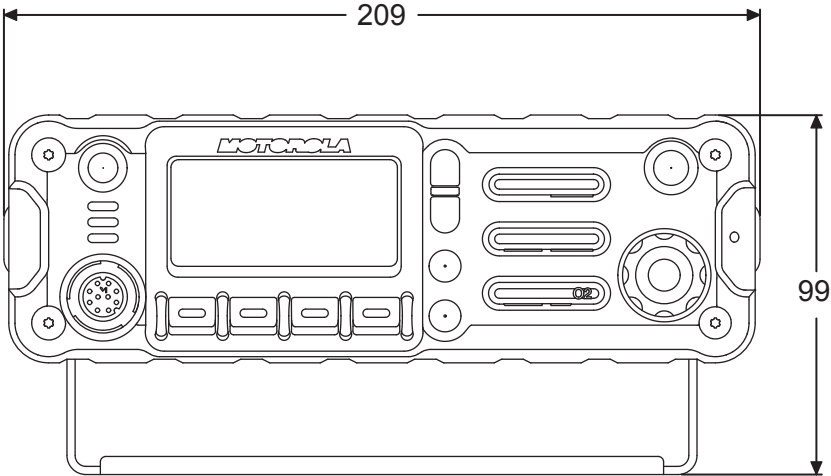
Side View of O2 Control Head with Remote Mount and Trunnion
